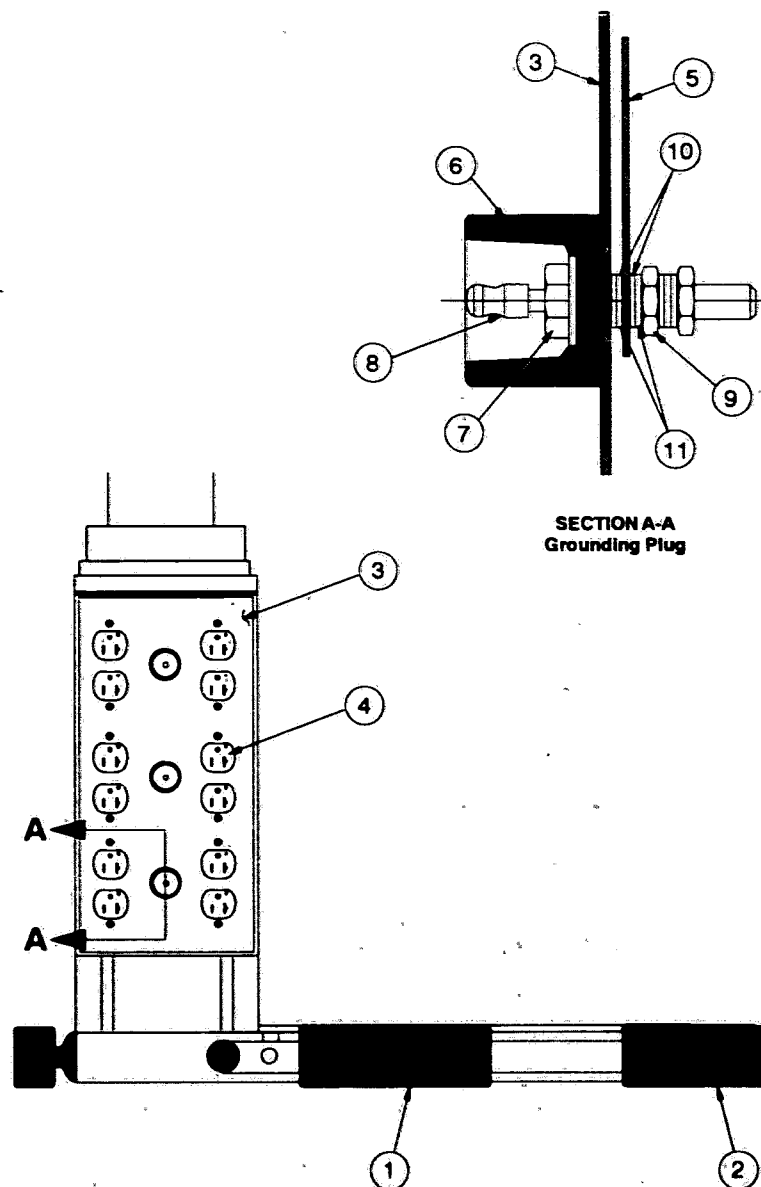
Support Head Assembly — Models 155, 245, 265, 425, 705M and 905M
